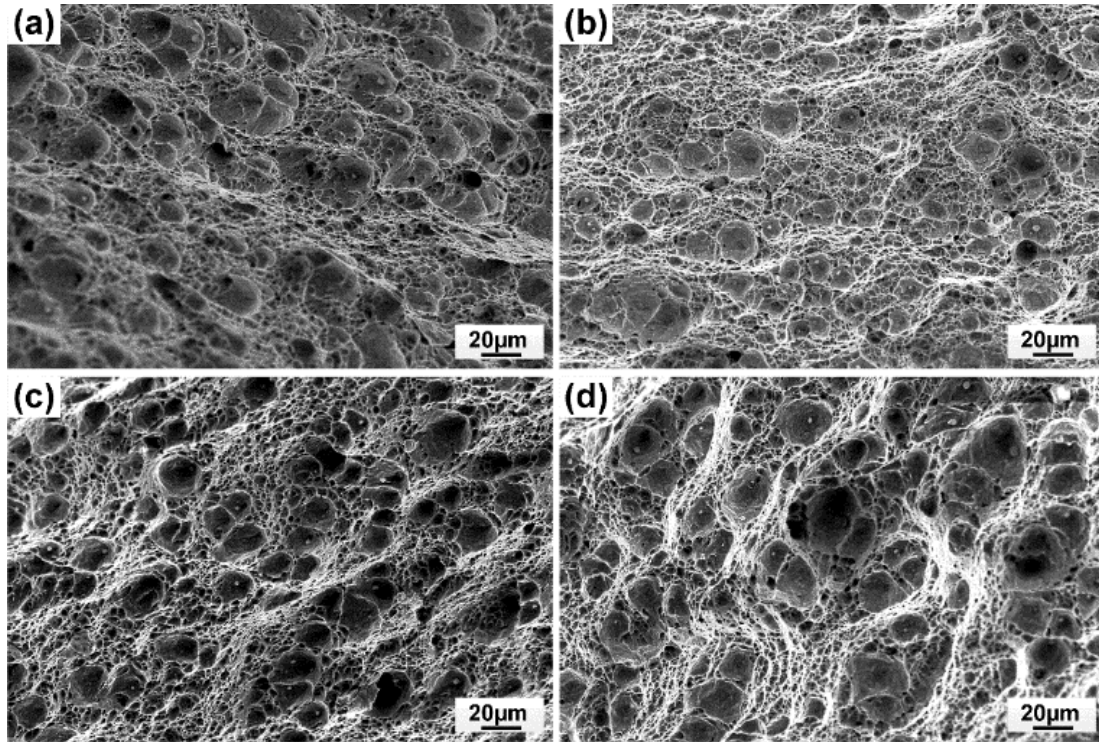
SEM images of Charpy fracture surfaces of samples tested at 0 °C: (a) autogenous laser weld, near the notch; (b) autogenous laser weld, towards the middle; (c) cold-wire laser weld with a WFR of 12 m/min, near the notch; (d) cold-wire laser weld with a WFR of 12 m/min, towards the middle.
